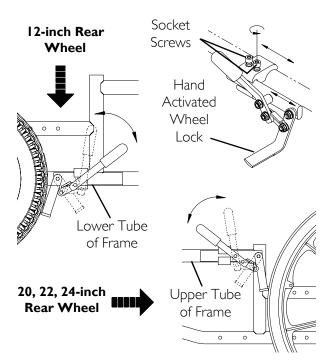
Installing/Removing Hand Activated Wheel Locks
